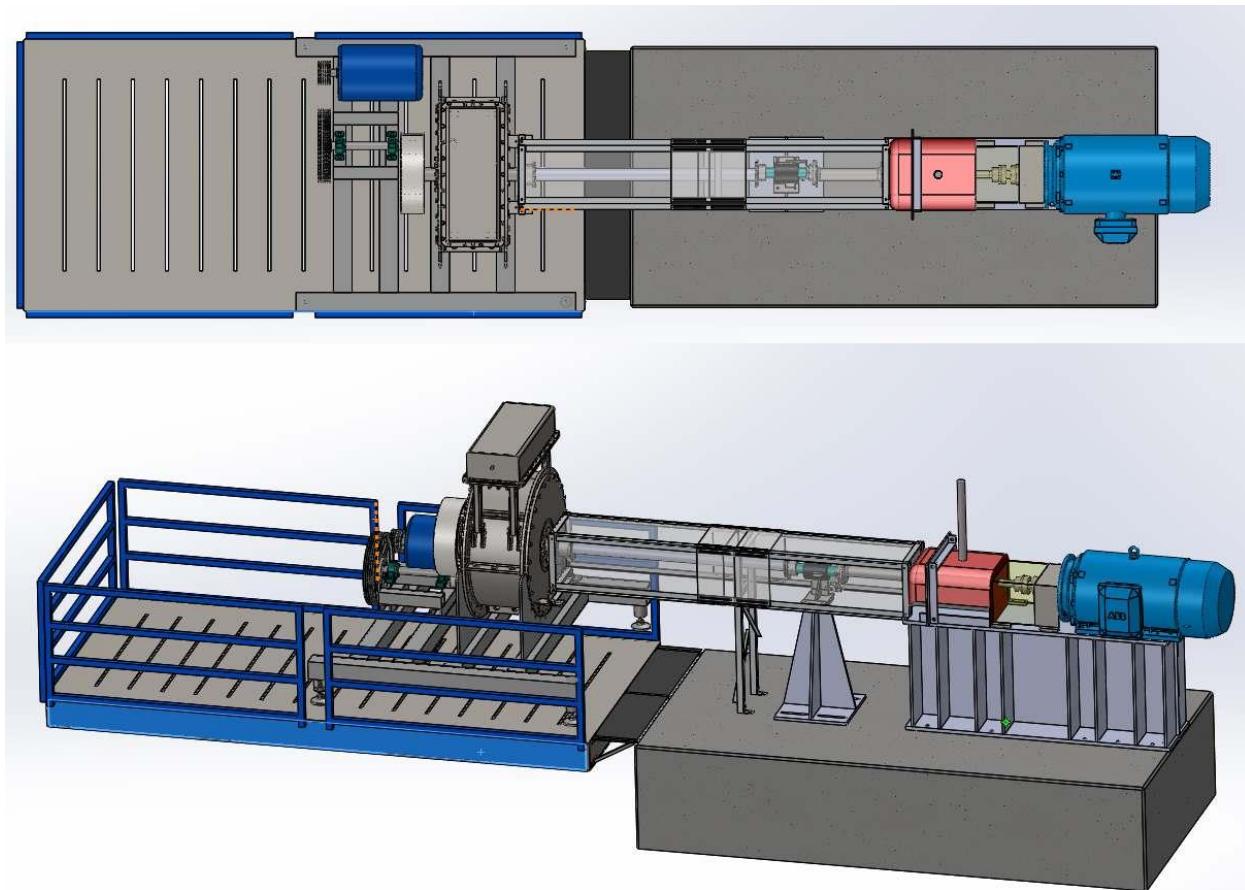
Solidworks CAD Assembly of ORPC Generator skid integrated with NREL Dynamometer.
